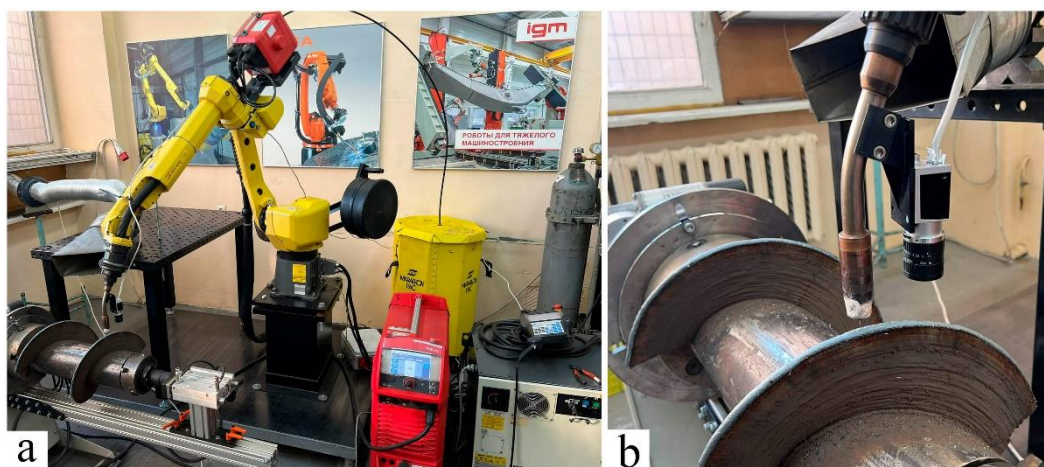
Welding robotic complex: a – general view; b – machine vision system
